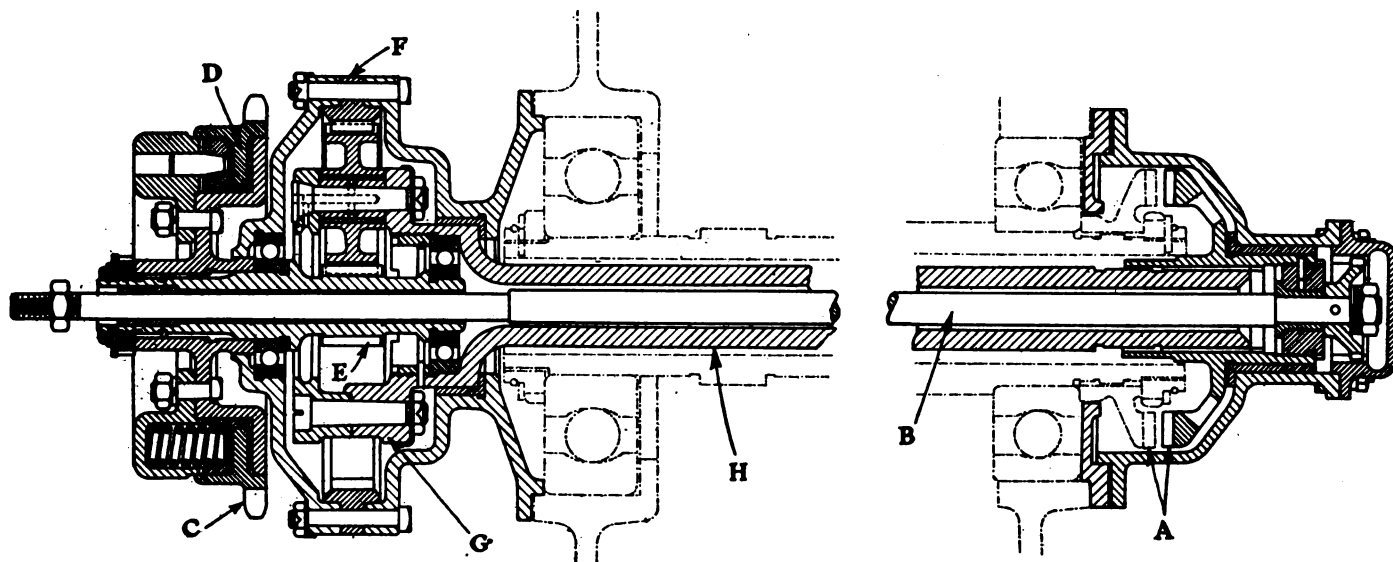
Arrangement of epicyclic starter gear on secondary transmission shaft
